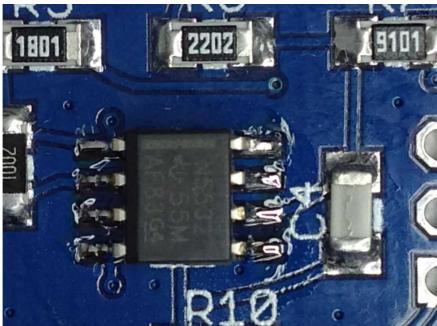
NE5532 with pins soldered. Note the flux residue on the pins. This will be cleaned off shortly.
